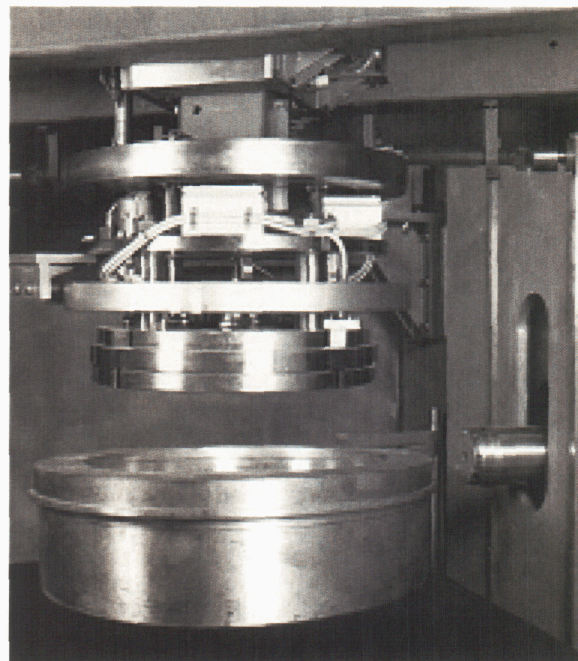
Arrangement for closure of copper high-level nuclear waste package using RPEB welding (courtesy of SKB)
